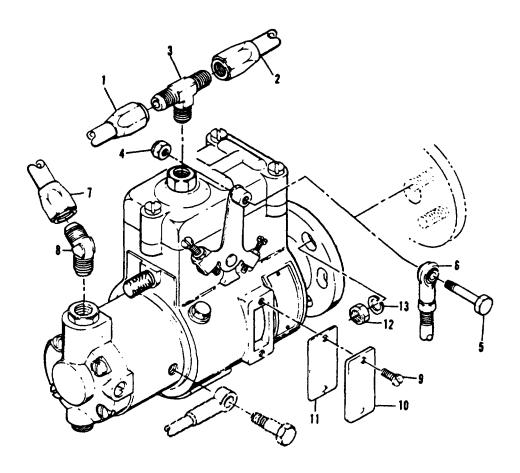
Fuel Injection Pump Assembly, Removal and Installation
